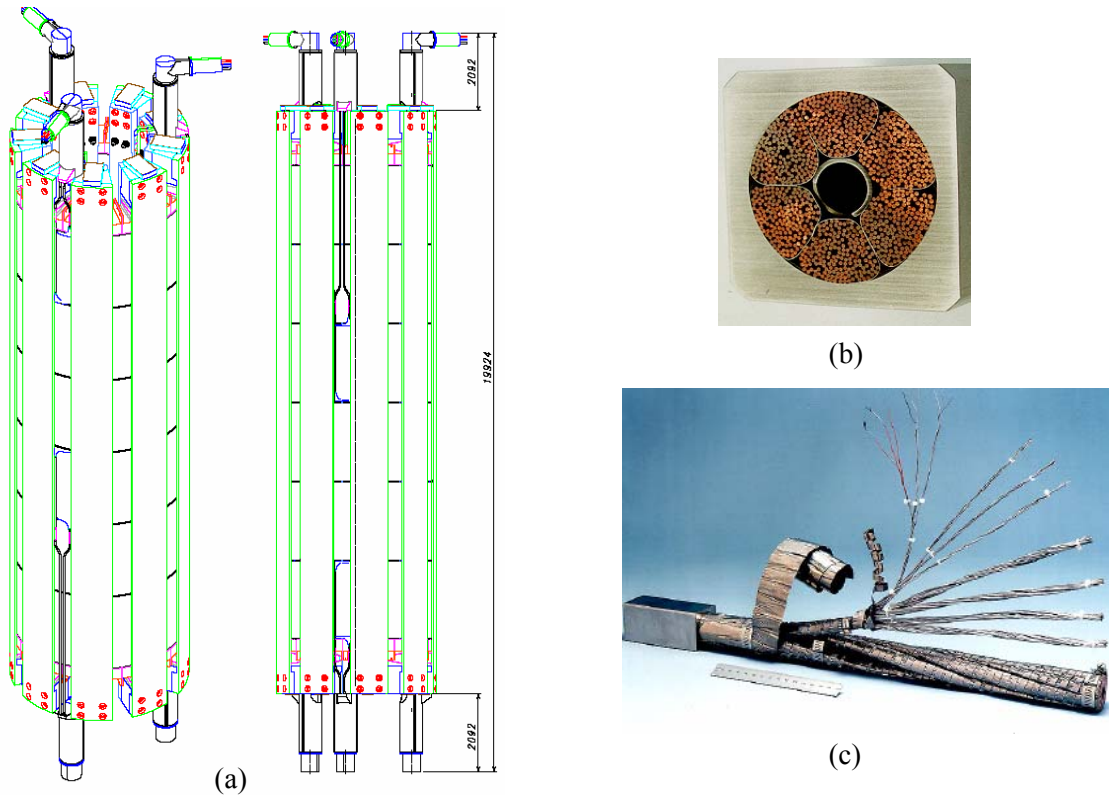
(a) Central solenoid view, (b) cross section of a cable in conduit conductor and (c) different stages of the cable wrapping around a central channel [1.9].
